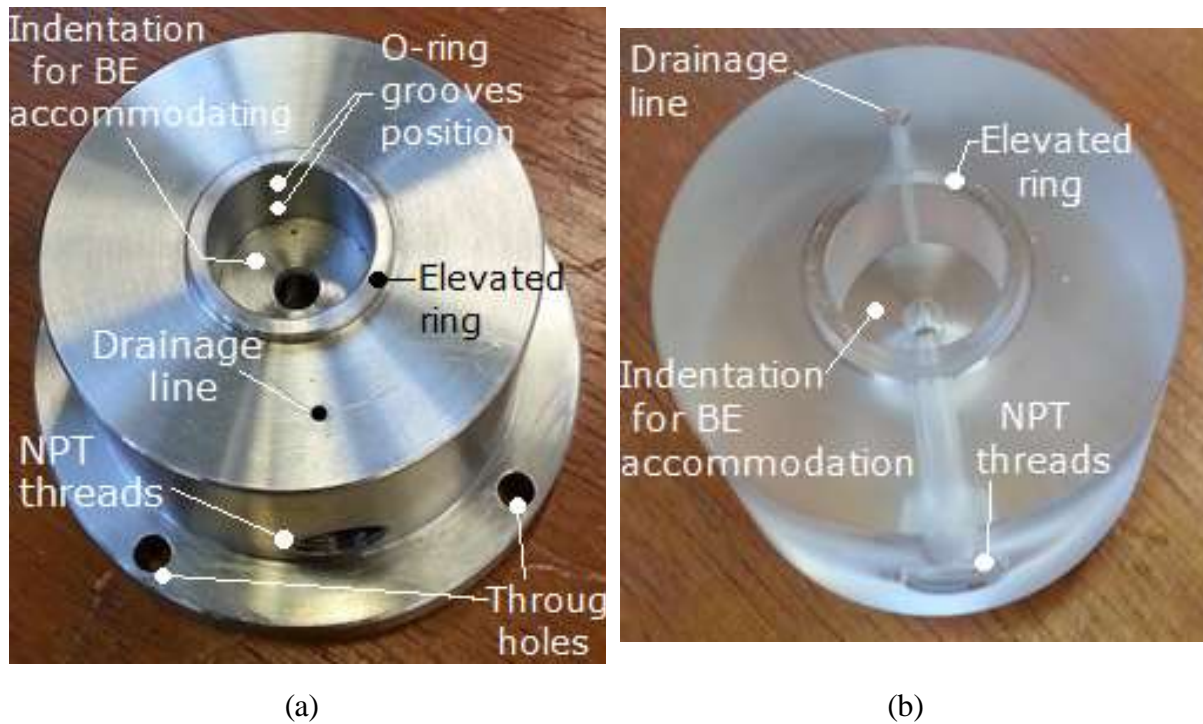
Machined triaxial parts with BE openings – (a) stainless steel pedestal; (b) acrylic top cap
